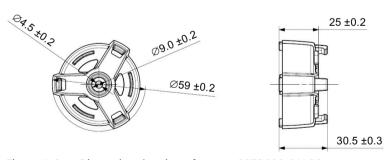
Dimension drawing of spacer 6GT2690-0AL00
